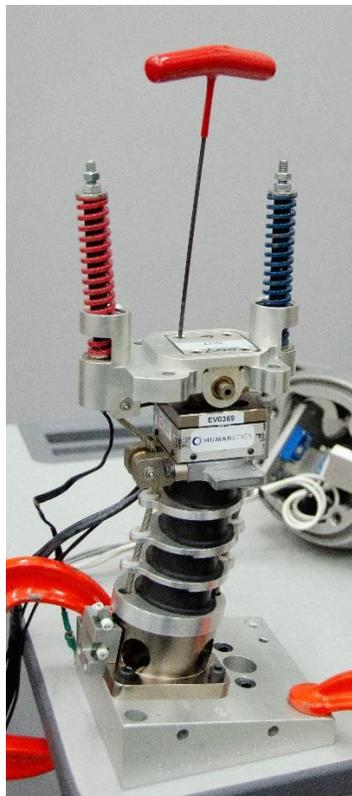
Install the flexion/extension stop assembly into the head/neck mounting platform
